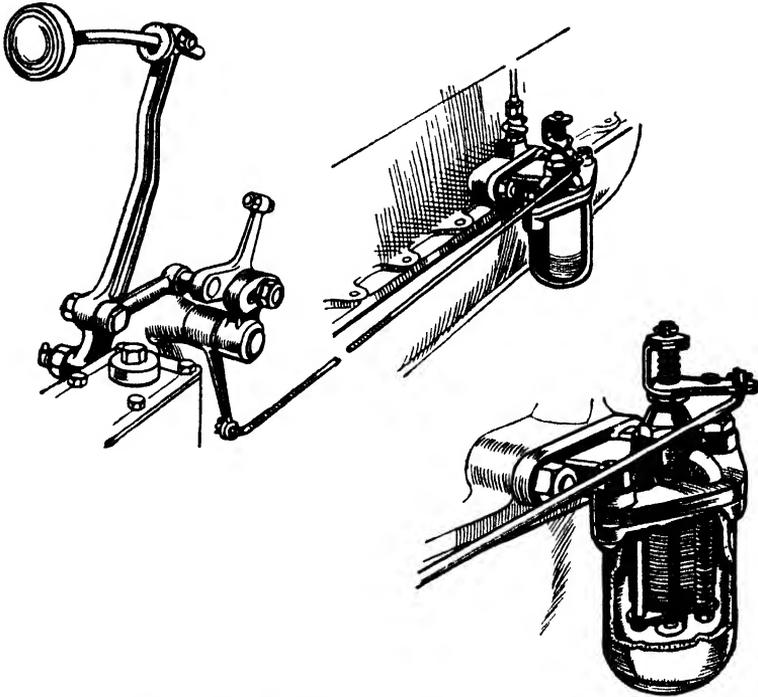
Self-cleaning Oil Filter operated from the Brake Pedal
